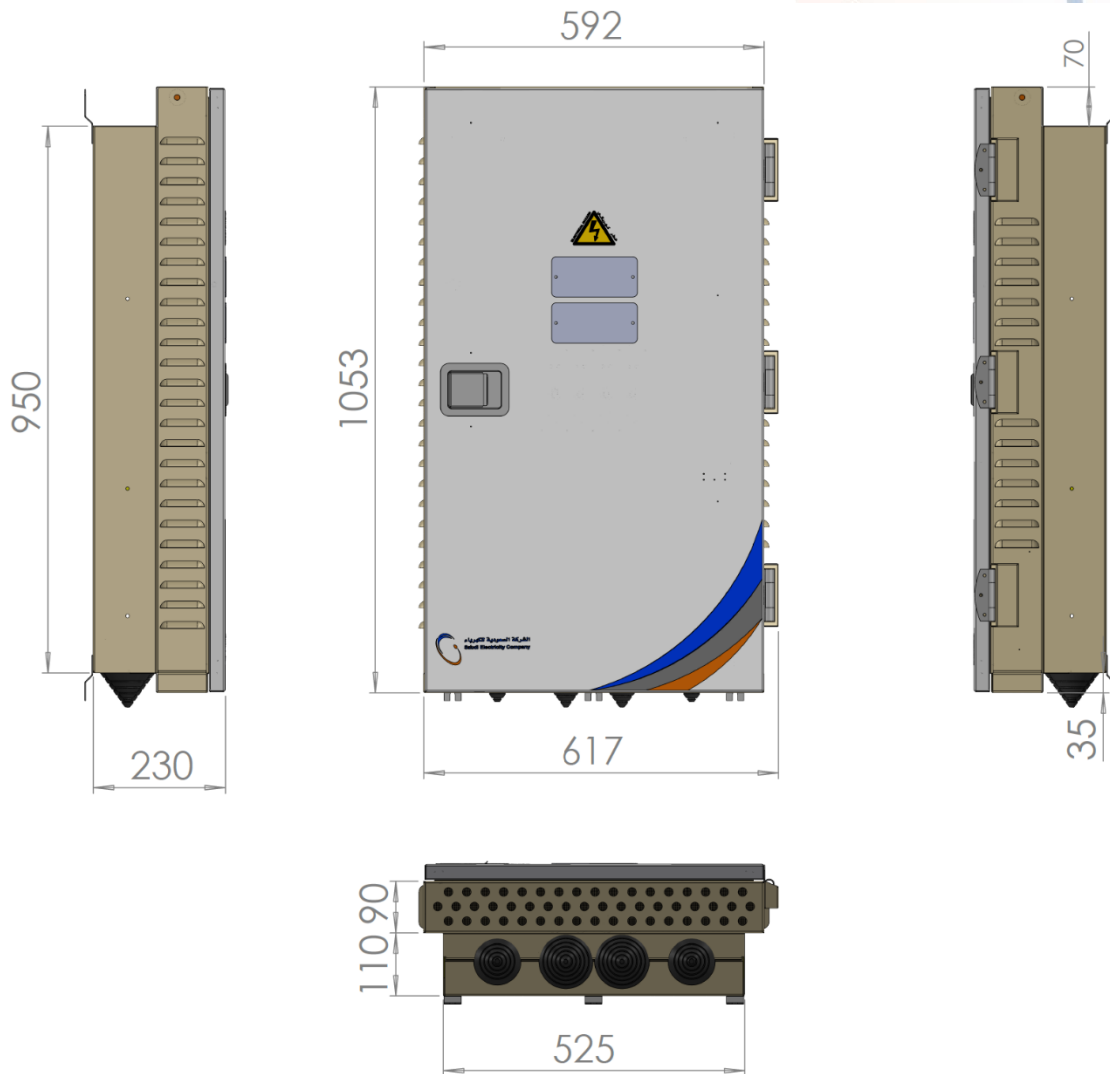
Perspective Drawing of a Double-Meterbox with Steel Enclosure
